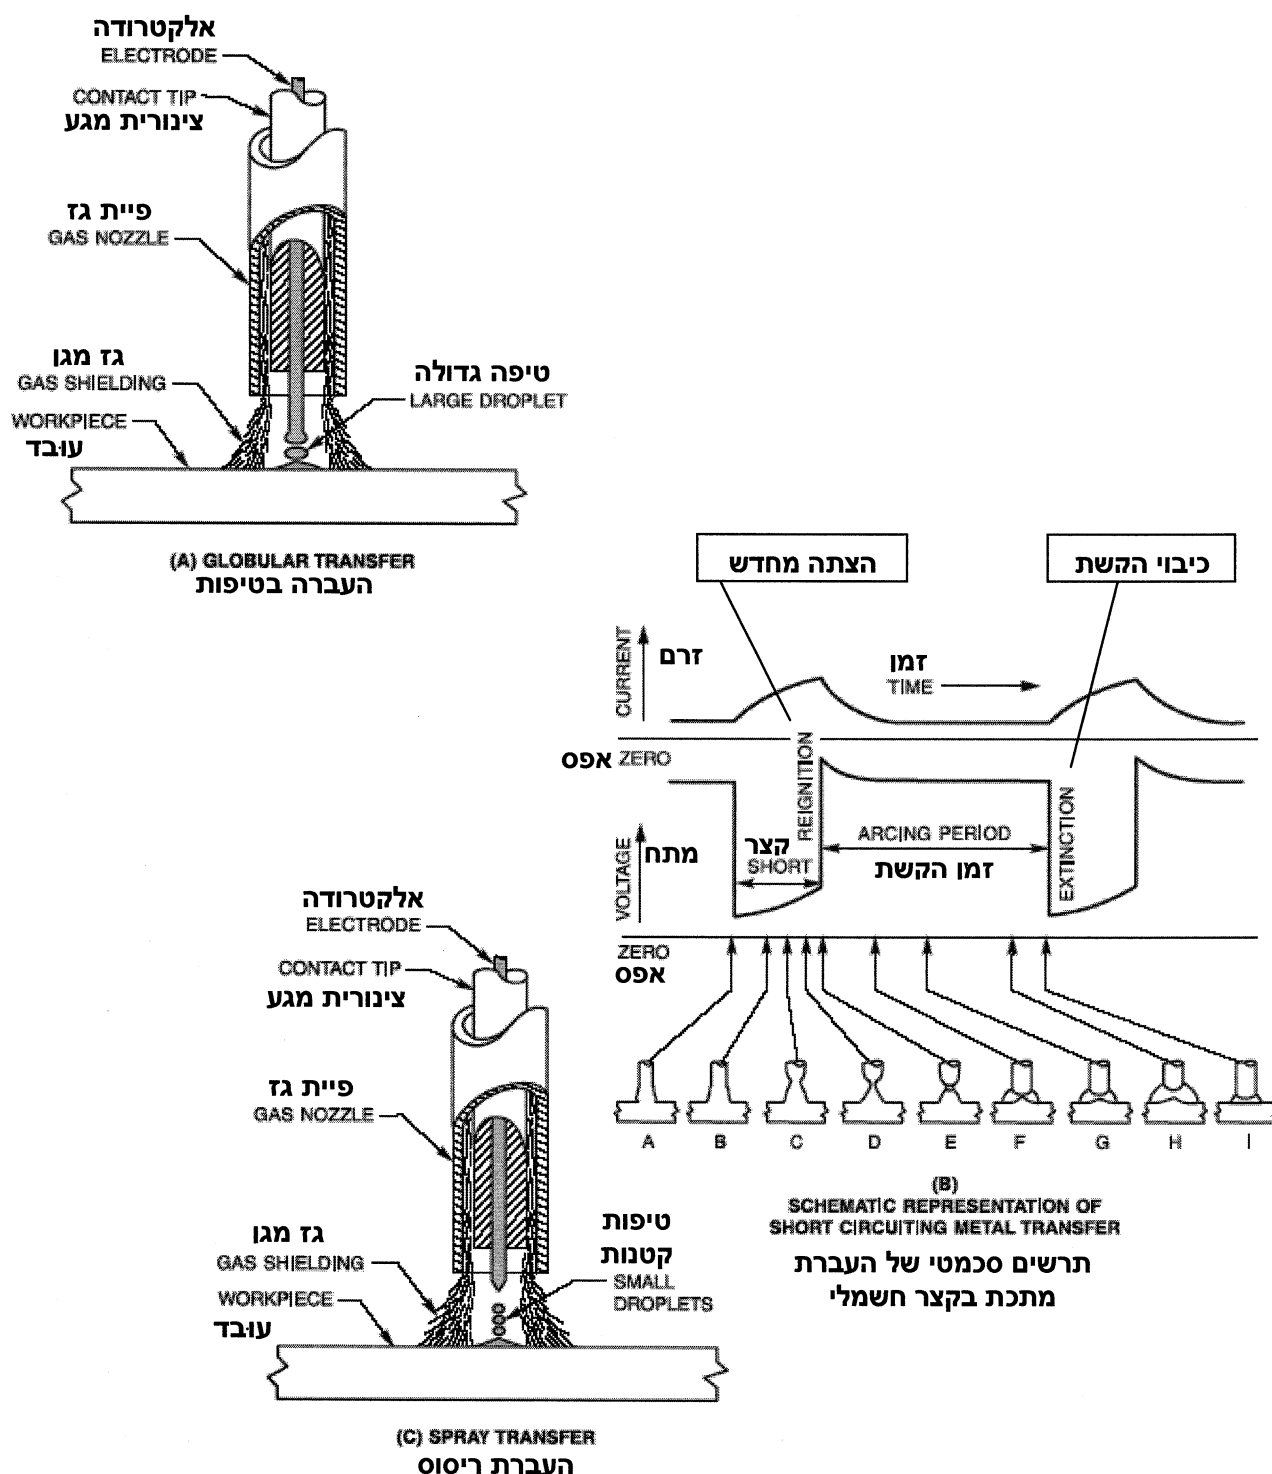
Metal Transfer in Gas Metal Arc Welding
